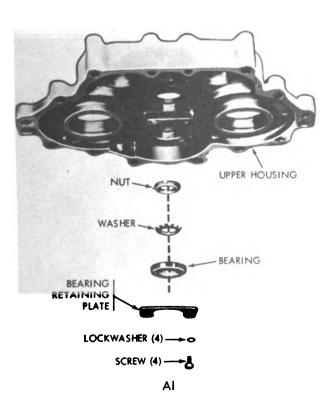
Traversing gearbox disassembly or assembly (11 of 15).
